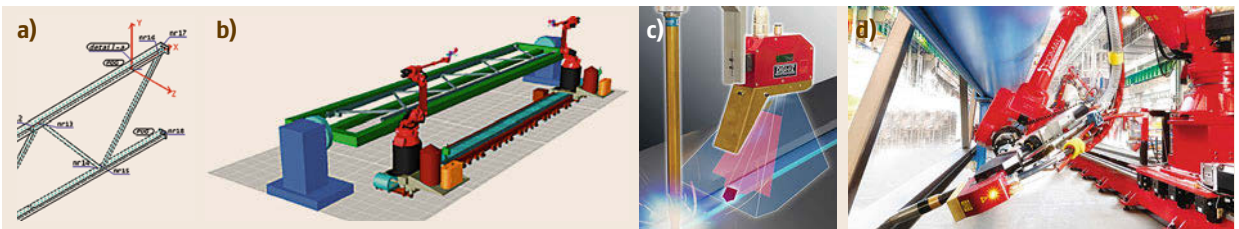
d GMAW welding of building trusses in lot-size one by robot. Illustration (a) shows the CAD drawing of a steel truss with relevant information for welding process, (b) one-half of the welding workcell with two welding robots working simultaneously on the truss when the neighboring truss on the other half is loaded or unloaded, (c) the laser-based seam finding and tracking sensors and (d) the welding robot (courtesy of Servo Robot, Canada; Goldbeck, Germany)
